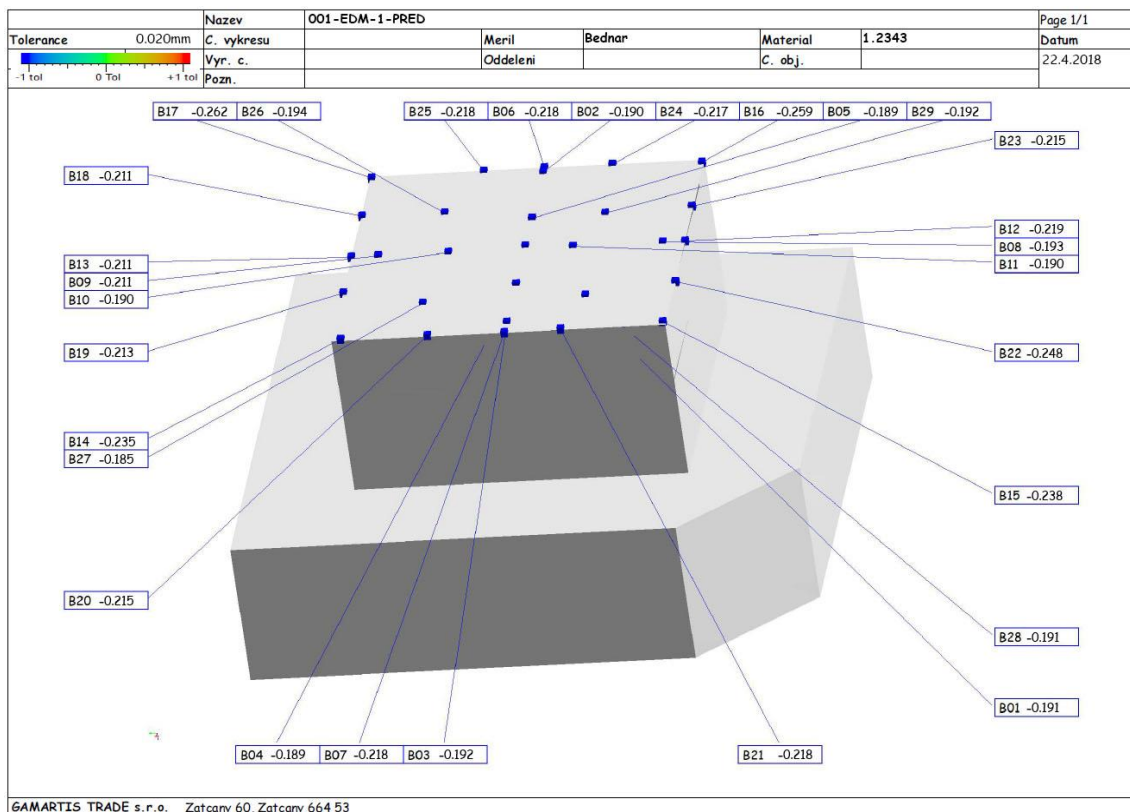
EDM-1 square shaped tool electrode measurement protocol.
